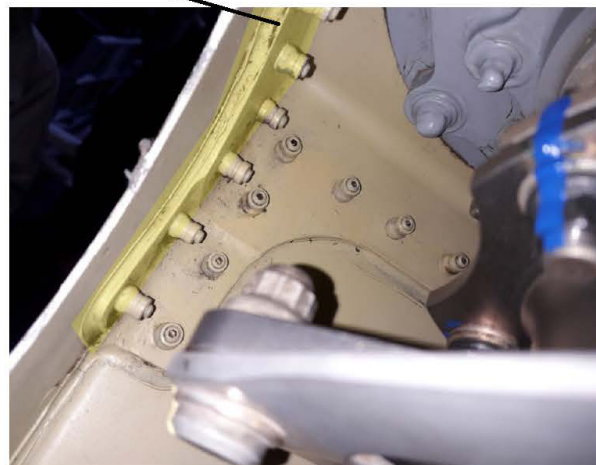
Tail section - Tail gearbox attachment structure - Detailed inspection (Sheet 4 of 5)
